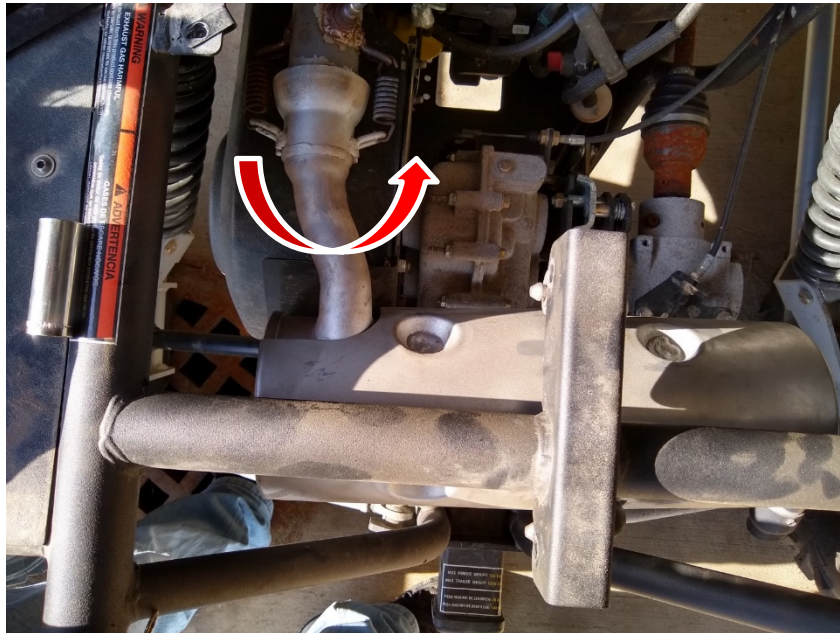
This figure shows the direction to rotate the muffler to release the inside spring.
